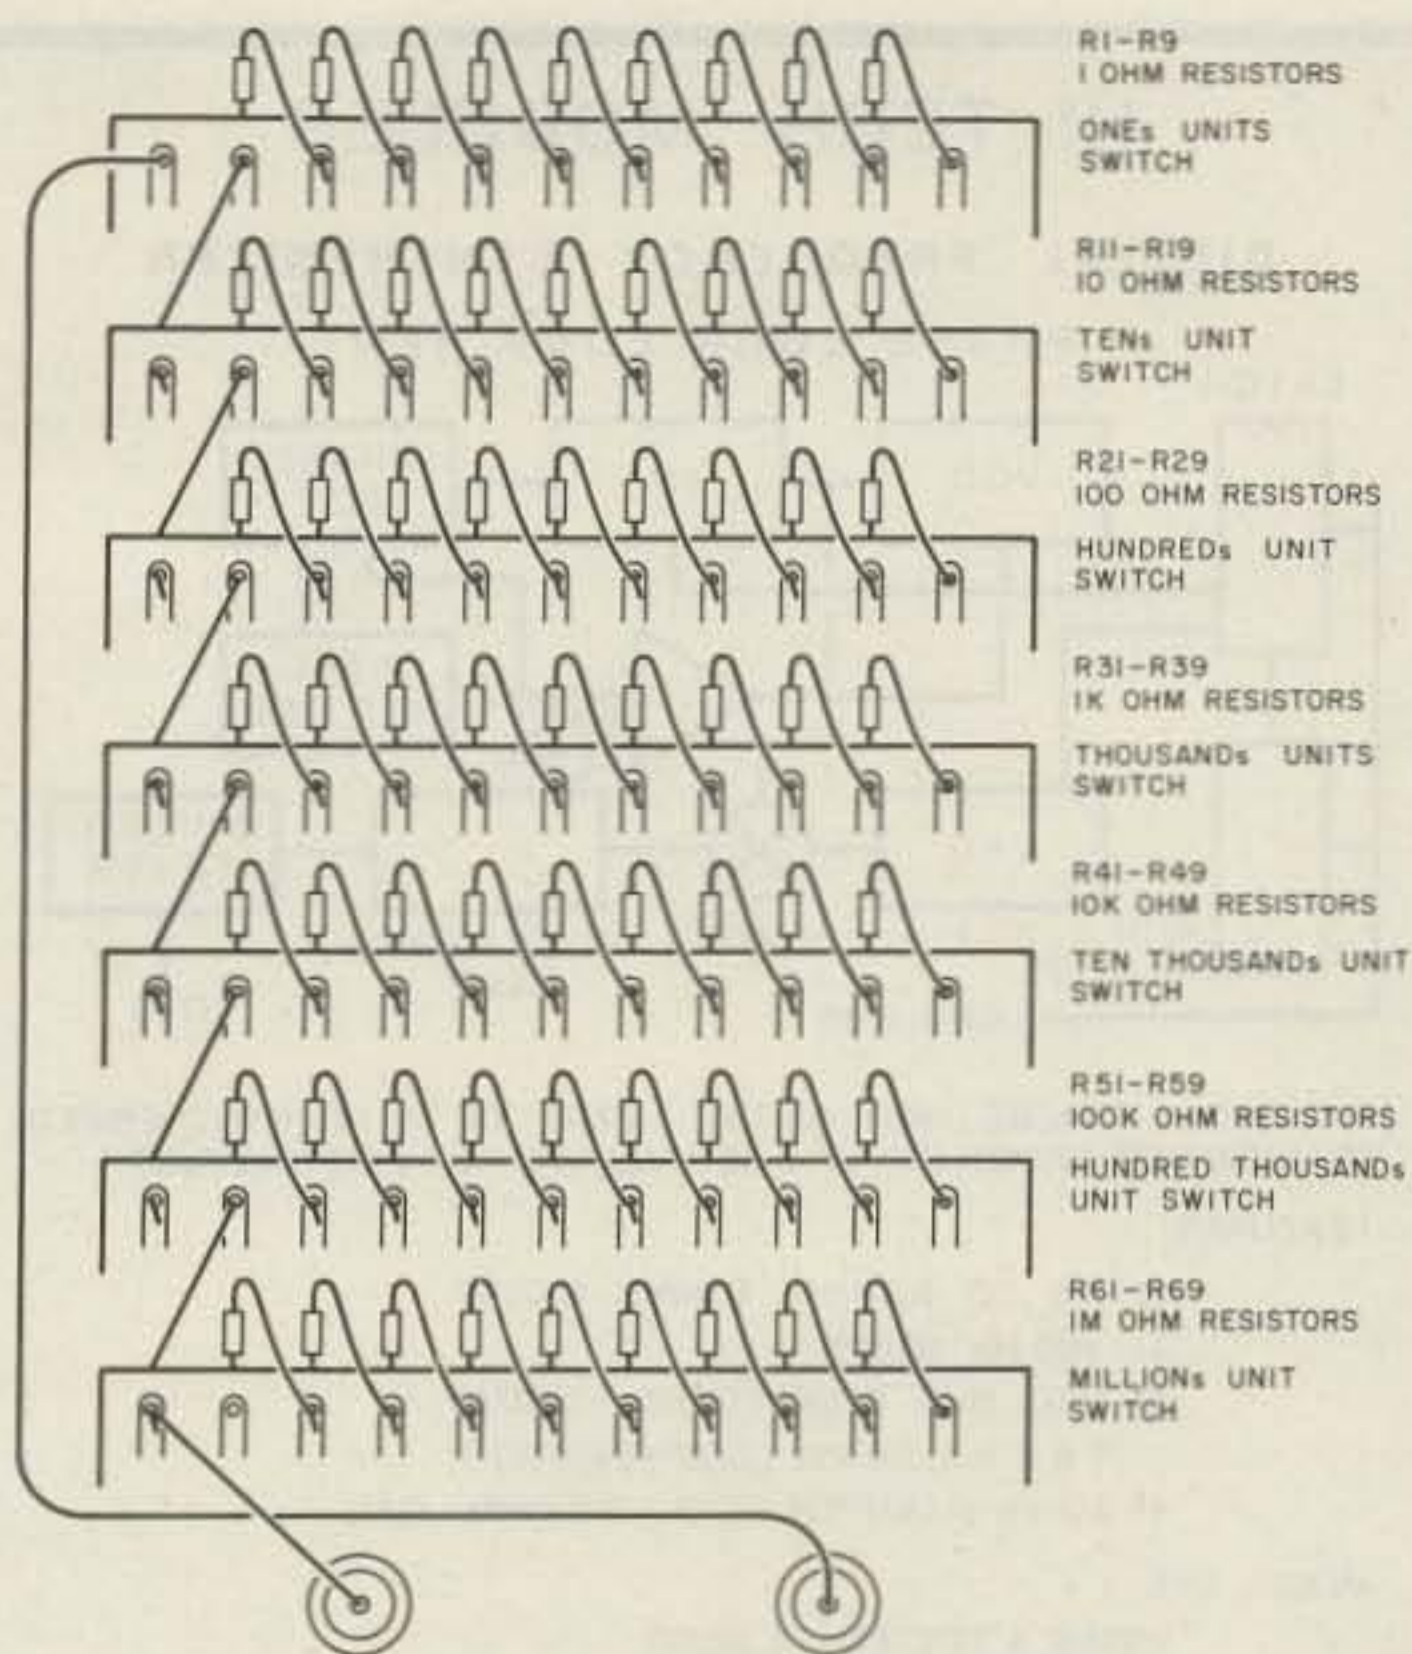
Back view of the switch assembly showing resistor layout and connection.
